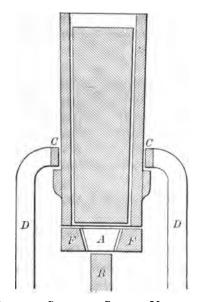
Proposed Stripping System, Movable Stool-Plug.
